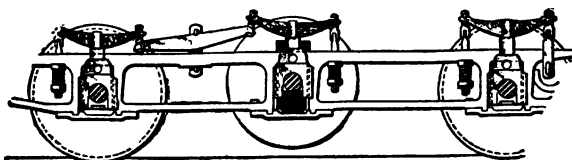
Blocking Broken Tire on Middle Driver, Mogul Engine. Illustrating Question 82.
